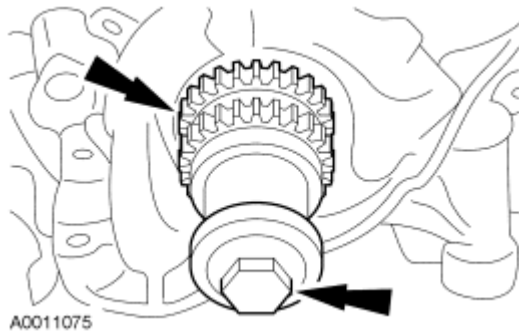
Locating Damper Bolt & Crankshaft Sprockets
